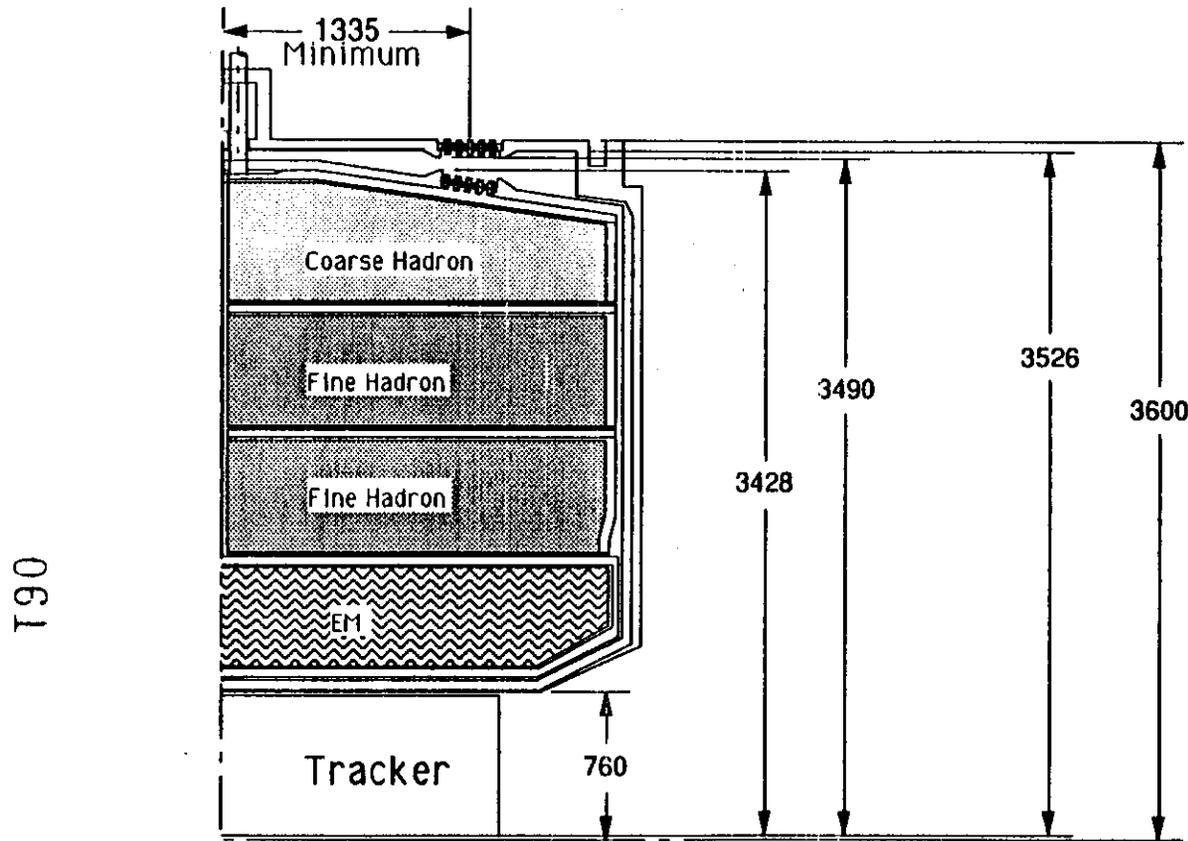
Section View Showing Location of Feedthroughs and radial dimensions
